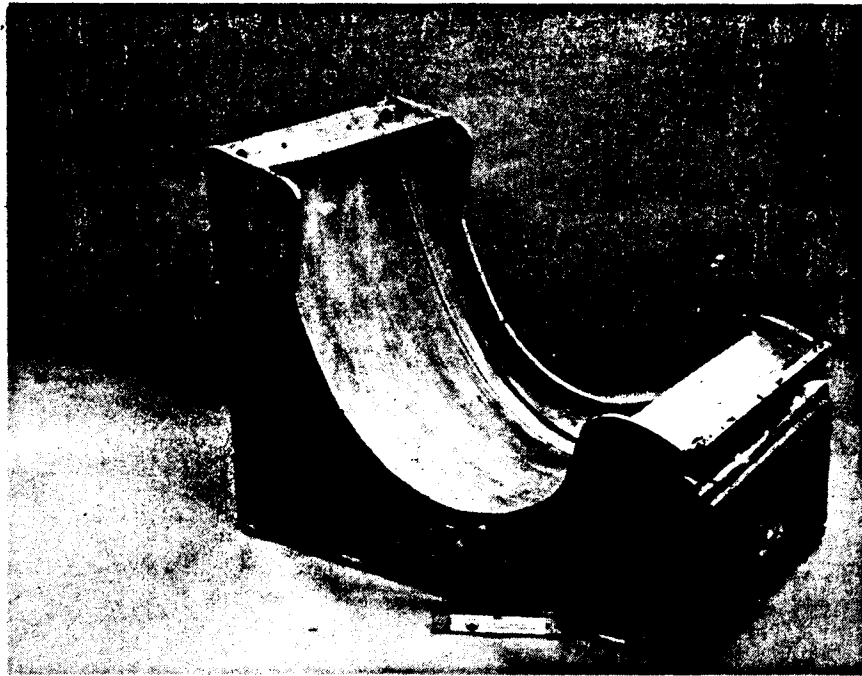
PROTOTYPE LEADING EDGE LAYUP MOLD
